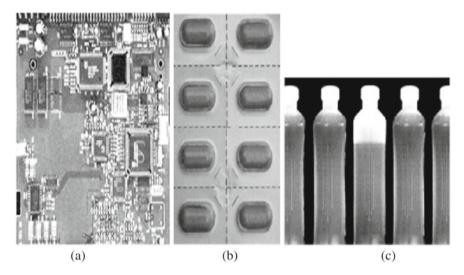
Examples of manufactured goods often checked using digital image processing: a circuit board controller; b packaged pills; c bottles [1]
